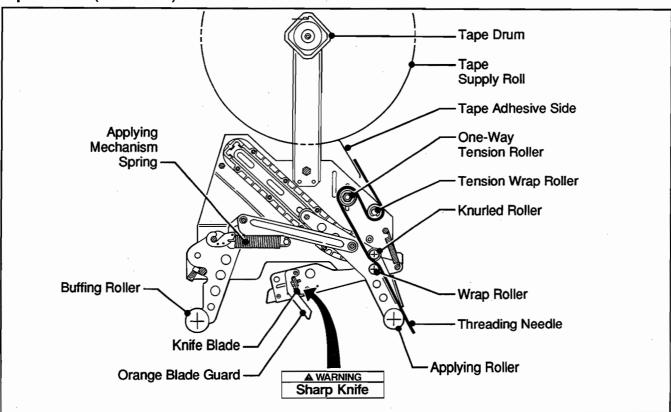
Tape Threading Diagram, Upper Taping Head (Left Side View)
